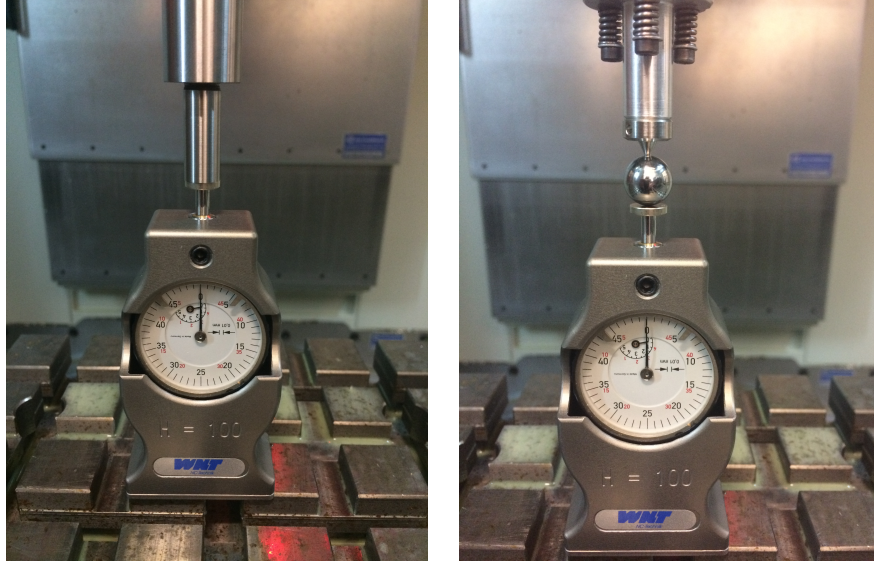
Photographs of the known-length tool (left) and tool-cup (right) being lowered onto the dial gauge to measure tool-cup length
